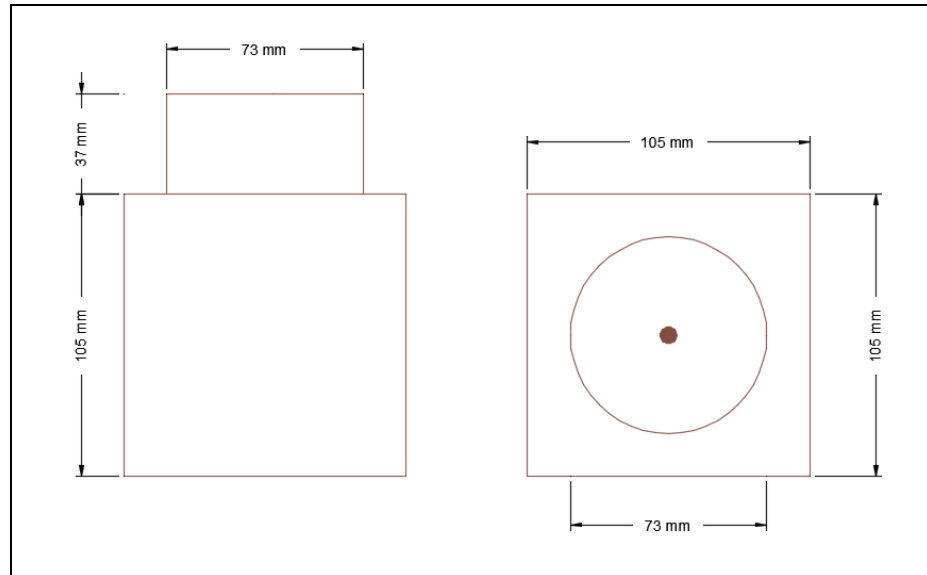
Wooden support dimensions for concrete specimens with embedded steel bars.
